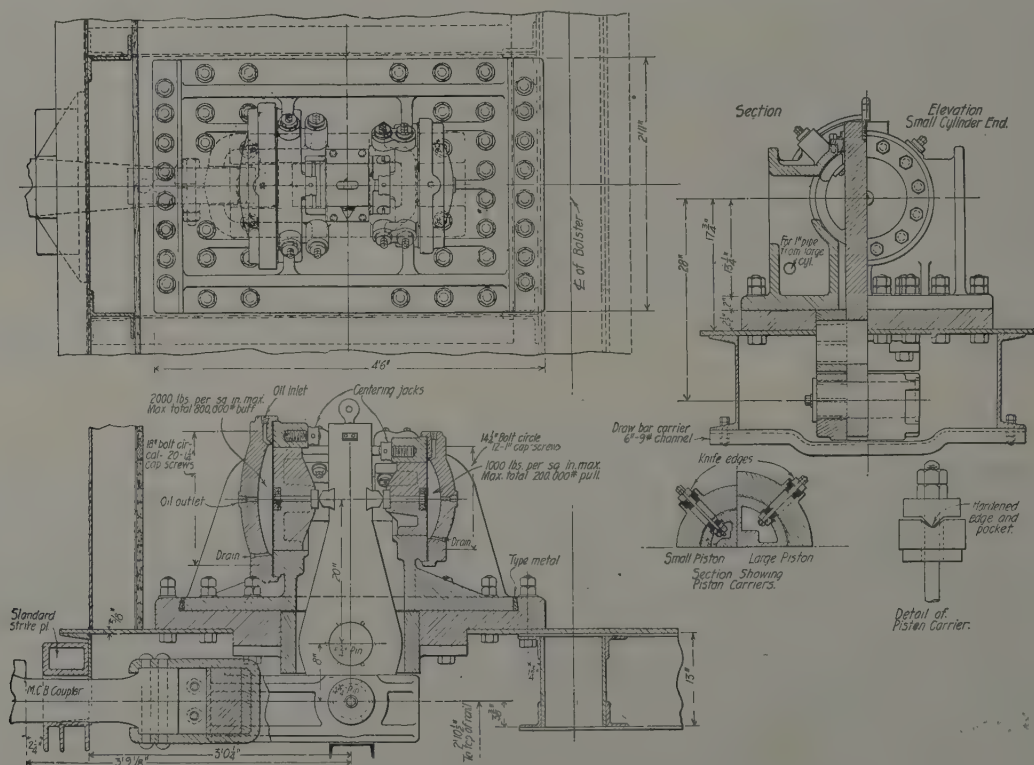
Weighing Head Assembly, Dynamometer Car.
